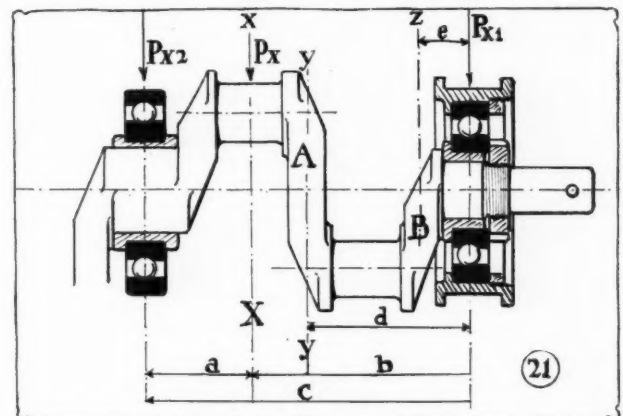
Above—Ball bearing crankshaft with felt washers protecting the bearings from the greatest projections of oil
